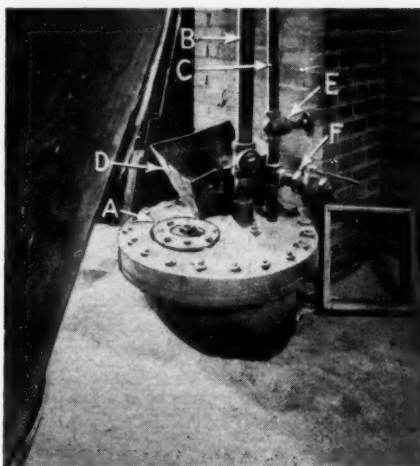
Top of Sending Cylinder Beside Sand Drier
